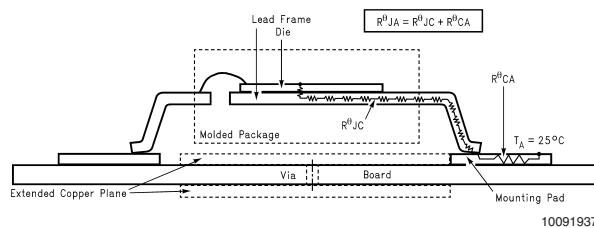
Cross-sectional view of Integrated Circuit Mounted on a printed circuit board. Note that the case temperature is measured at the point where the leads contact with the mounting pad surface
